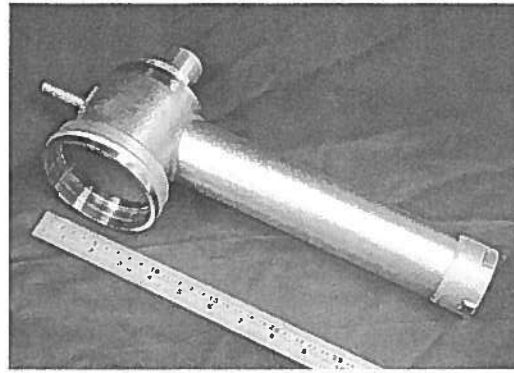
LC Ti-6Al-4V integrated boom/housing, after initial machining.
